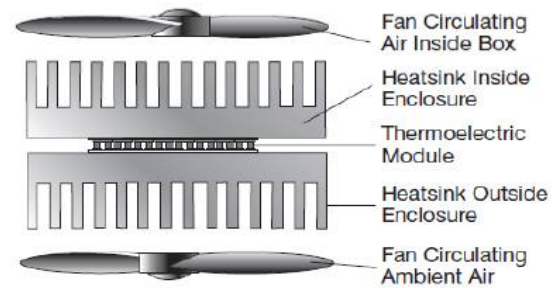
Assembly of air-to-air thermoelectric cooler [2].
